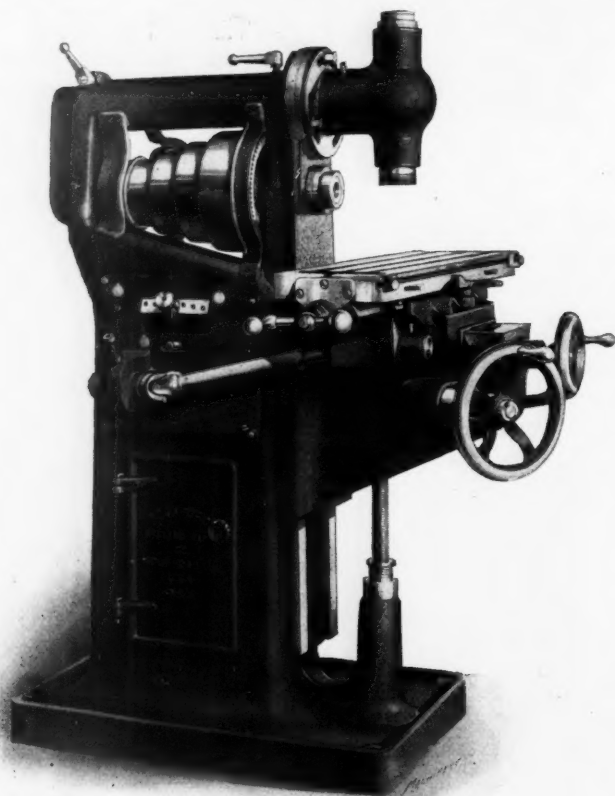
Rockford Milling Machine with Vertical Milling Attachment
